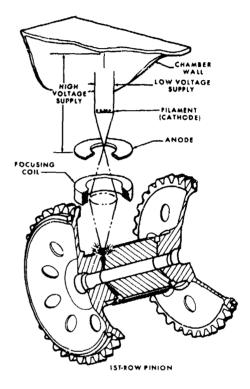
Electron-Beam-Weld Schematic.
